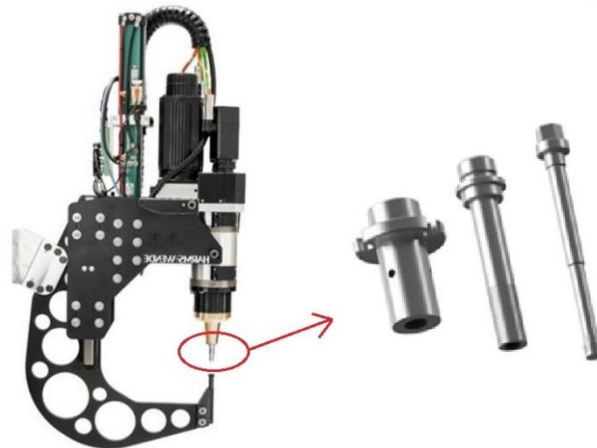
Schematic illustration of the RPS100-V32 welding machine and exploded view of the welding tool. Source: Harms&Wende.
